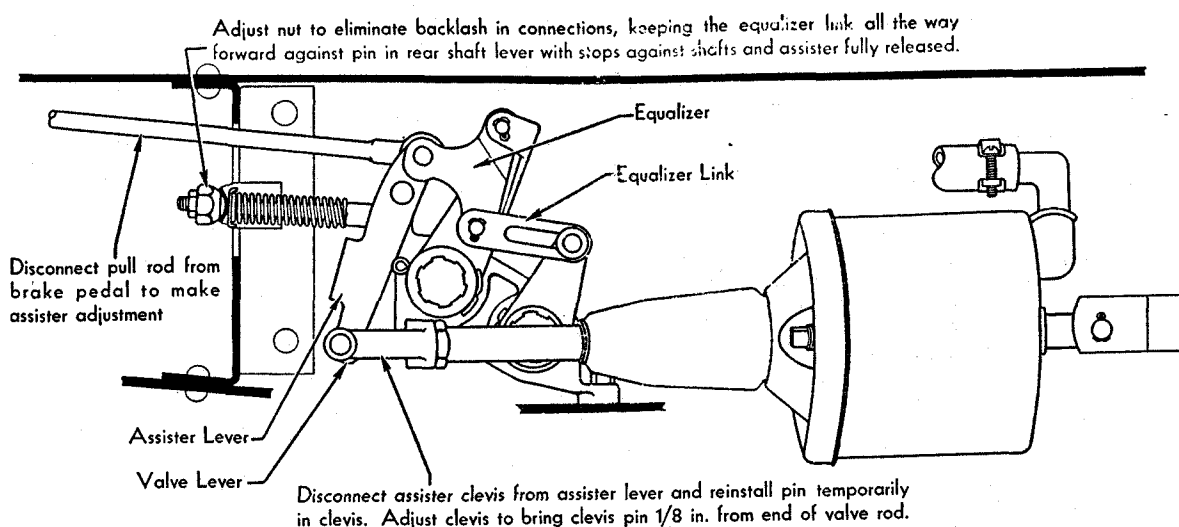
Brake Assister Adjustments on Cadillac 355-D (Series 10 and 20) Cars
